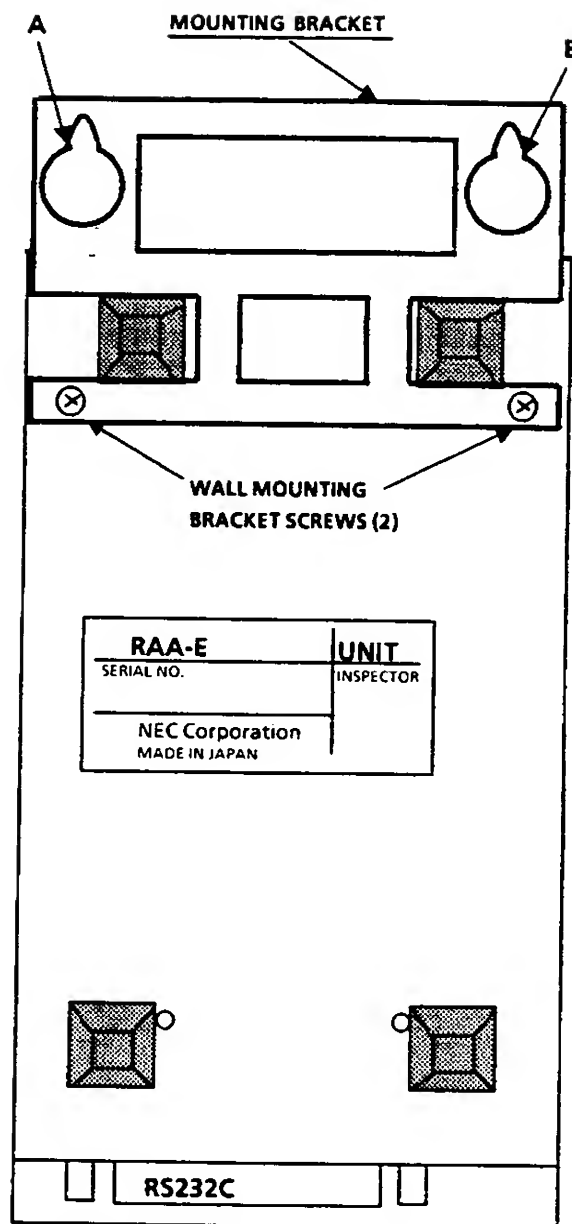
RAA-E Bottom View with Wall Mounting Bracket Attached
